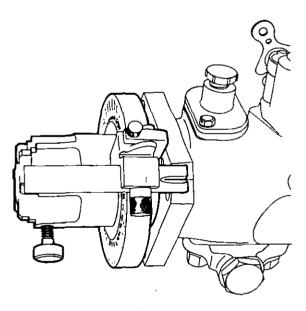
Checking Marking Angle on Fuel Pump Flange.
